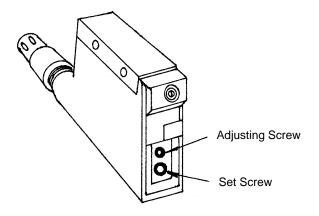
Shift Point Adjustment to H642 and H644 Pulling Head
